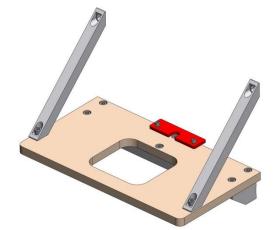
Hand-tighten the screws holding the two Braces to the top of the Shelf.
